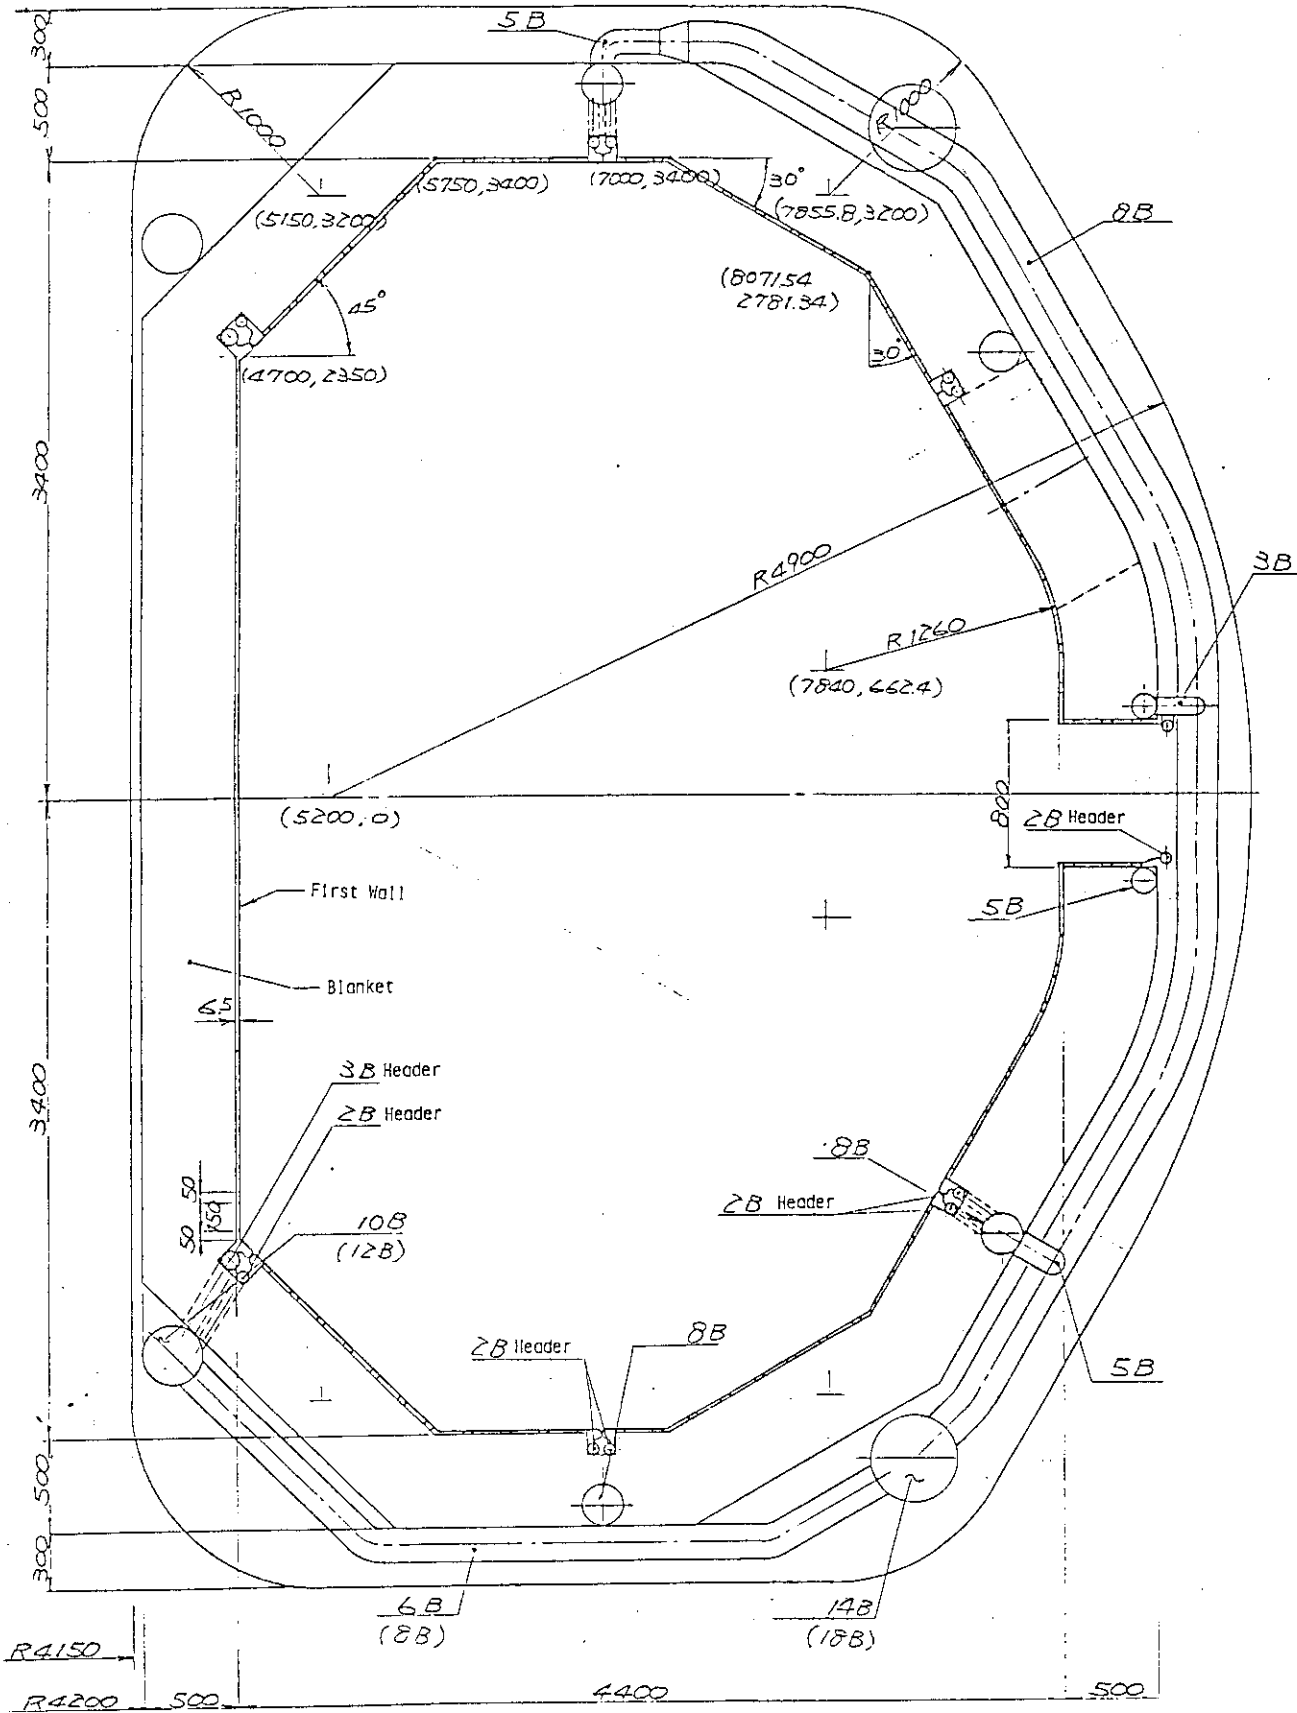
SPTR Power Plant (Elevation View of First Wall and Blanket (2))
